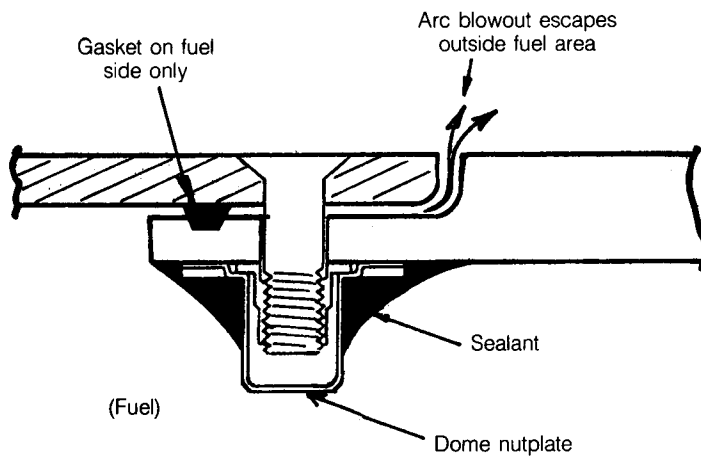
Lightning Protection of Fuel Tank Access Door Seal
